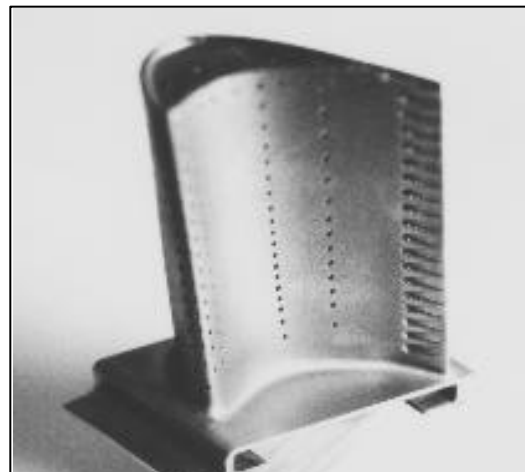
typical film cooled turbine blade (*Heat Transfer Laboratory, University of Minnesota*)
